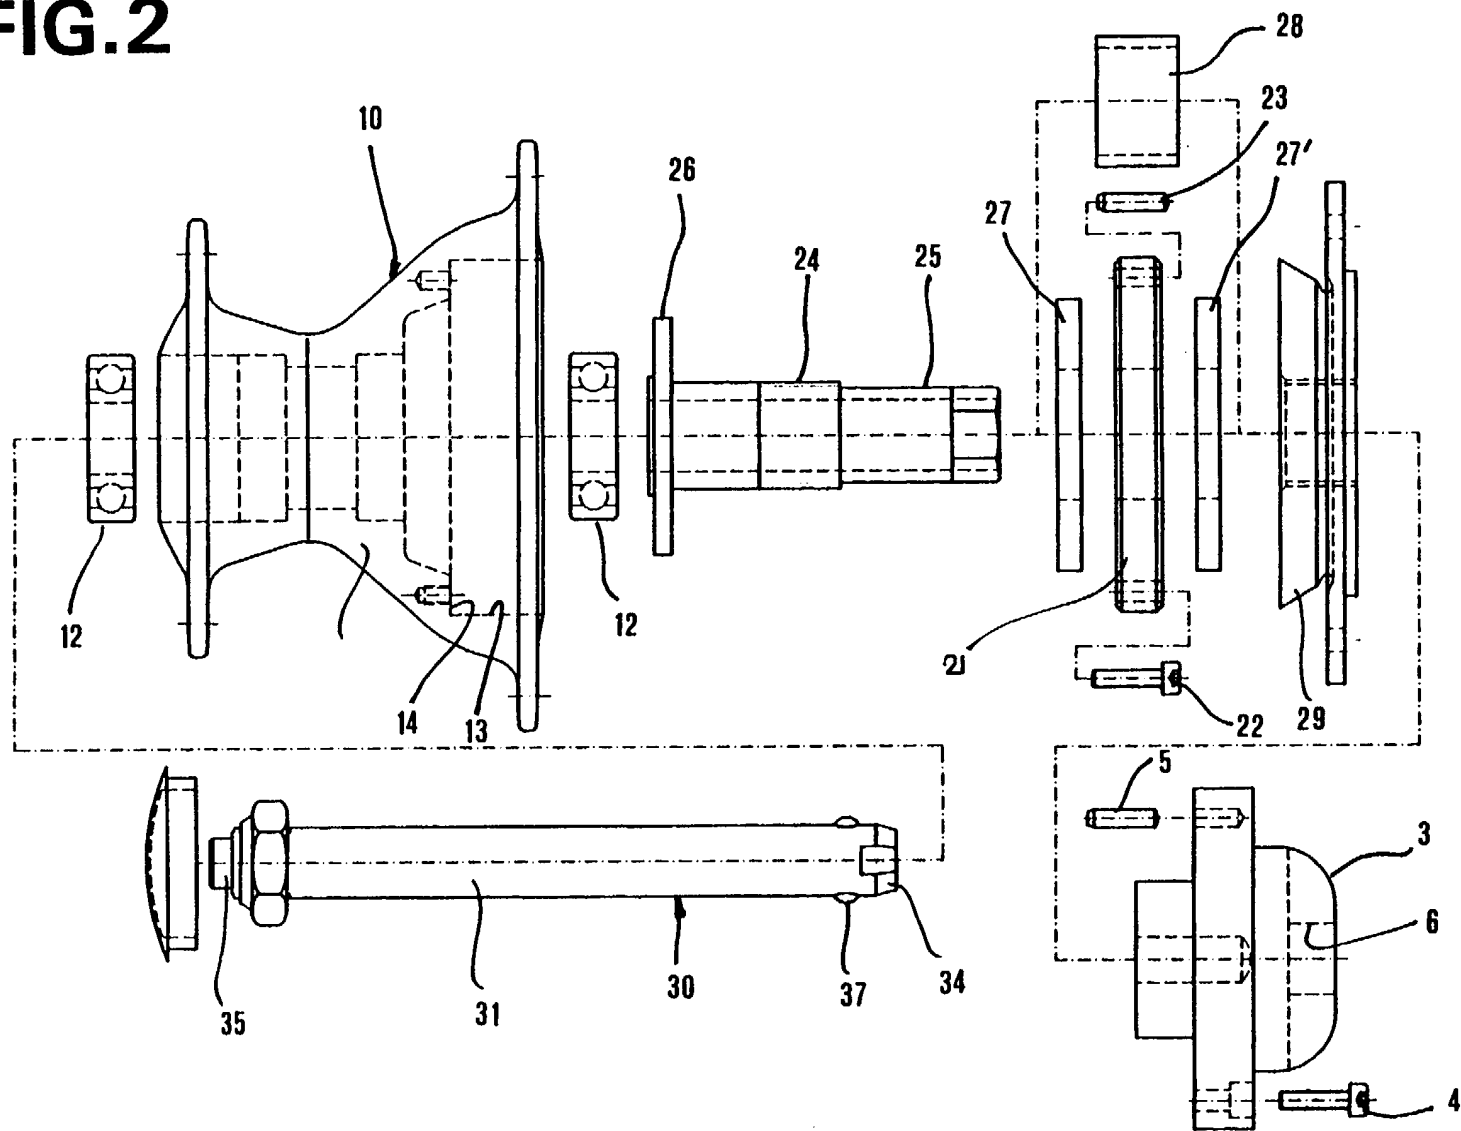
is a detailed cross-sectional view of a mechanical assembly, likely a valve or actuator. The assembly features a central horizontal shaft (30) passing through a housing (10). The shaft is supported by bearings (12, 13, 14) and has a central actuator (20) with a piston (23) and a rod (26). The actuator is connected to a lever arm (3) via a linkage (2). The lever arm is pivoted at one end (6) and has a handle (34) at the other. The handle is connected to a rod (31) which passes through a seal (37) and a bush (35). The entire assembly is mounted on a base (1) with various fasteners (4, 5, 25, 27, 28, 29, 32, 33, 36).
